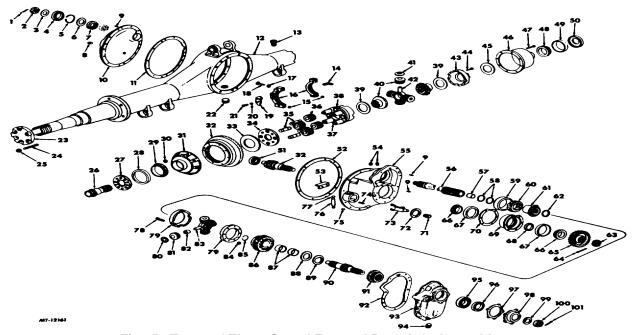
Two and Three-Speed Forward Rear Axle Assembly
